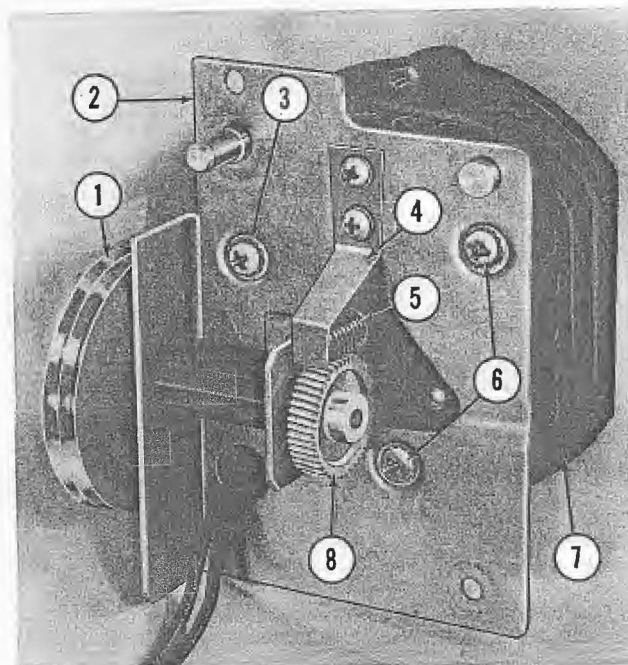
TURNTABLE DRIVE GEAR ADJUSTMENT
